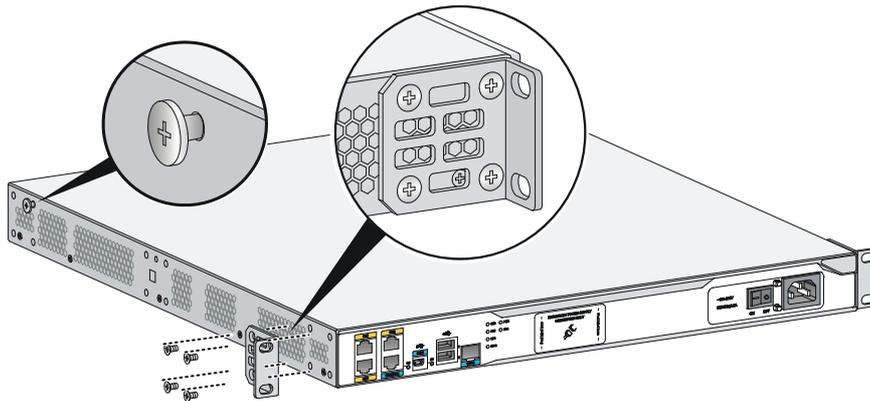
Attaching the front mounting brackets and load-bearing screws to the MSR3044
